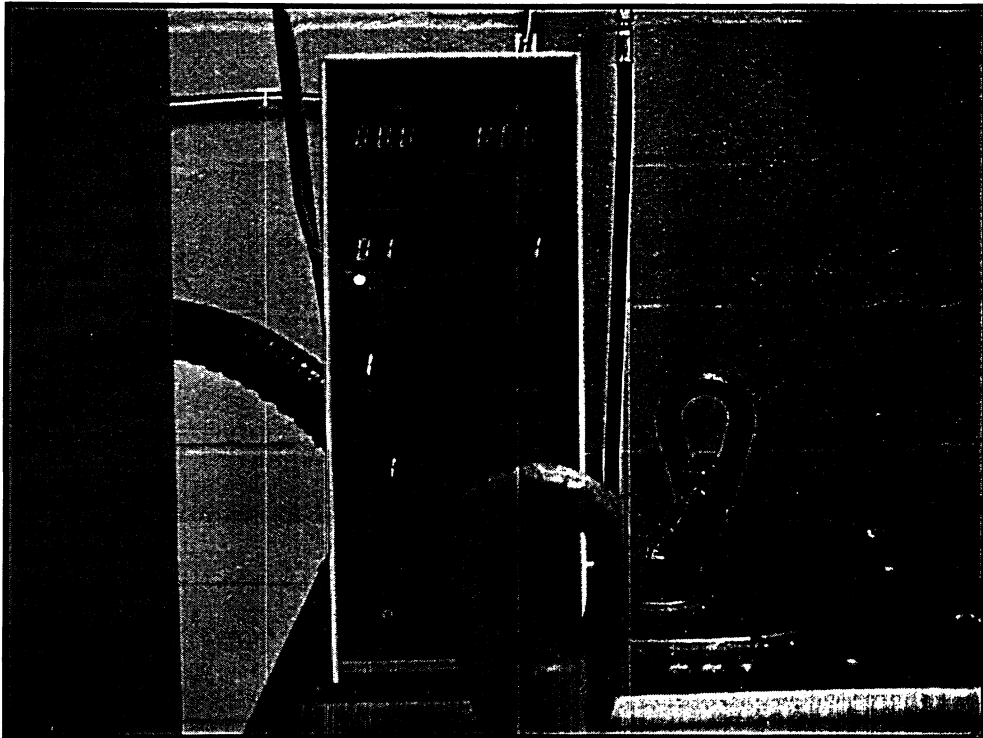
MIYACHI, MM-121 B high precision weld checker
